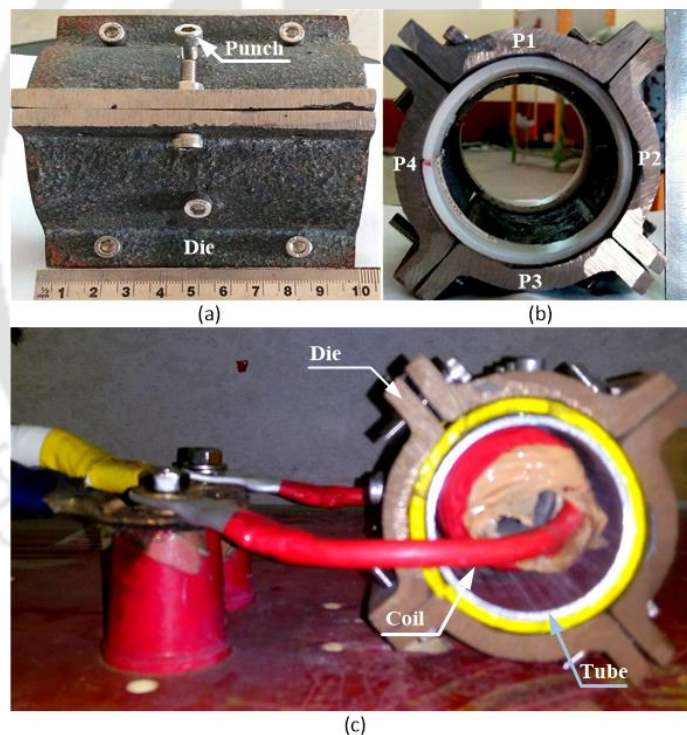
Die (a) Top view, (b) Front view and (c) Setup ready for the experiment
